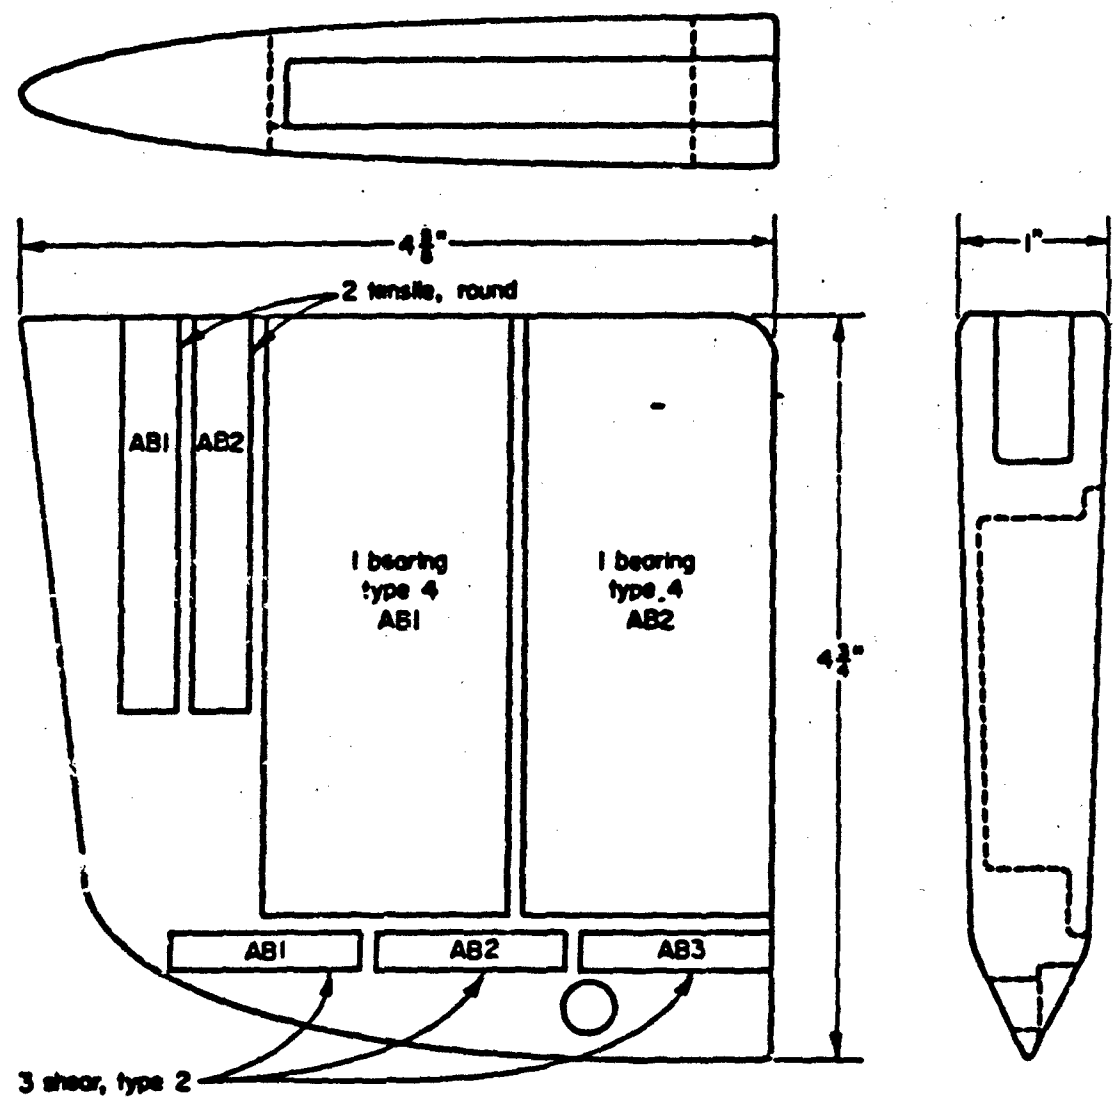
LOCATION OF TEST SPECIMENS FOR CASTINGS AB AND AC
